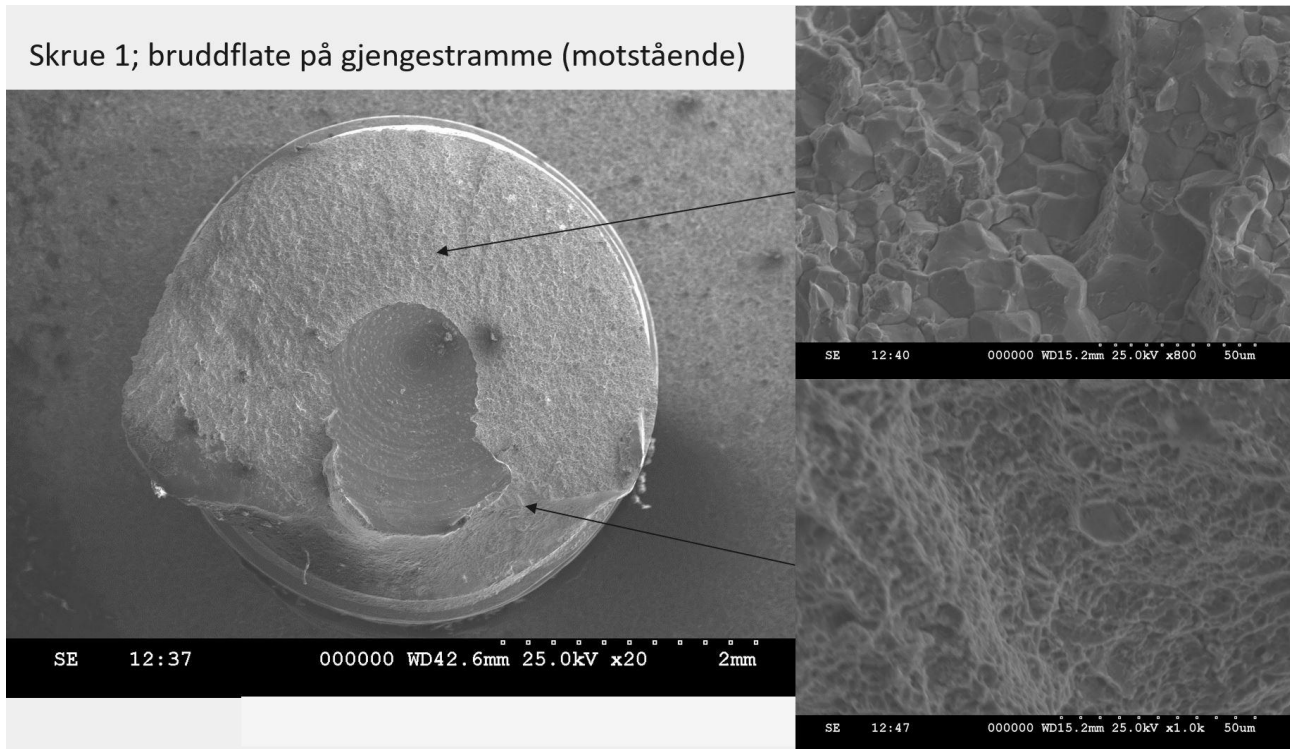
Microscope image of the threaded rod of the top screw. The two smaller images show different fracture mechanisms. The top shows hydrogen embrittlement where the different grains are visible. The lower is a ductile overload fracture with dimples. Image: FOLAT / NSIA
